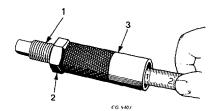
Adjusting Valve Guide Installer for Proper Height
